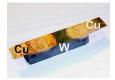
The sample of W with copper strips welded to it with the use of plasma pulse
